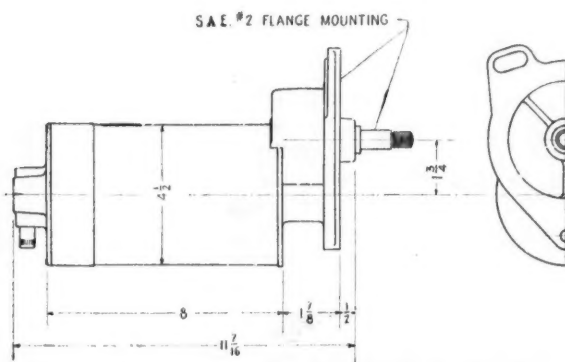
Outline drawing of generator with No. 2 standard flange mounting
